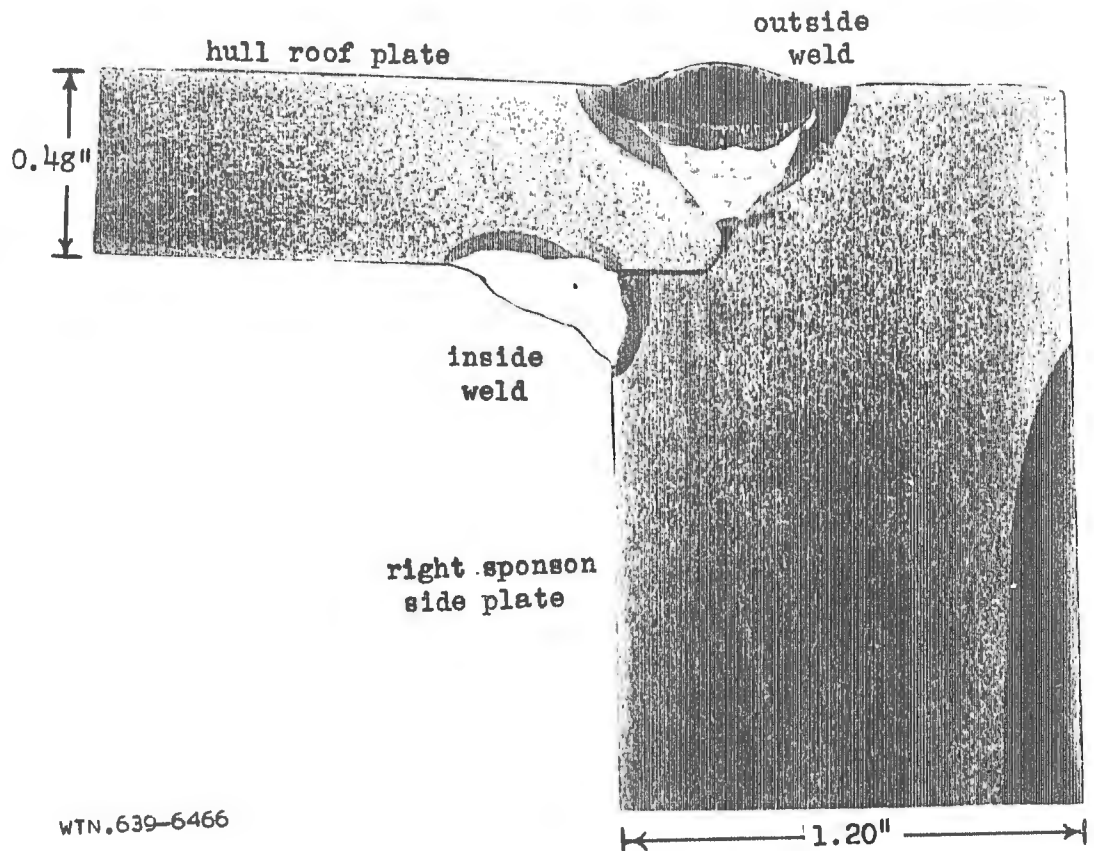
Macroetched Transverse Sections Through Welded Attachment Joints of Sample No.2.
